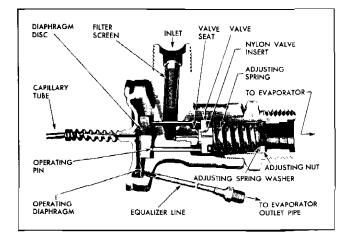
Cross Section of Thermostatic Expansion Valve
